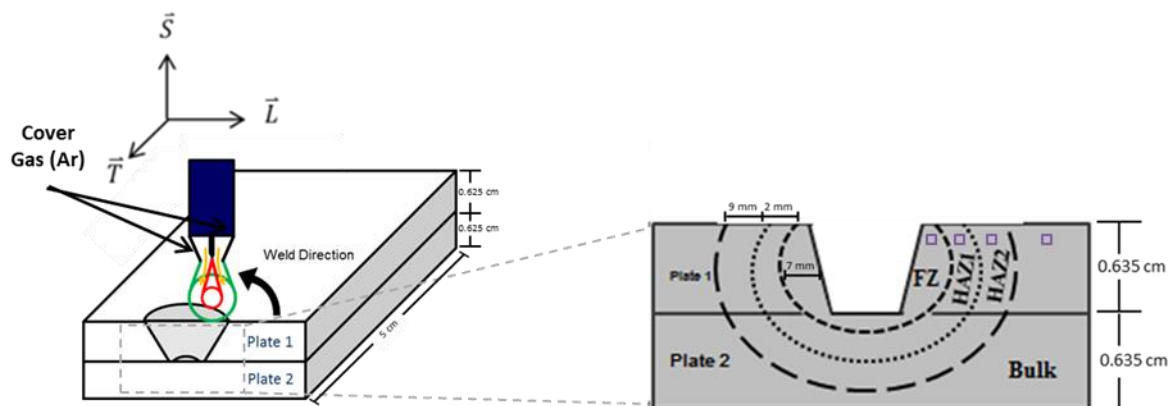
1. Schematic of TIG welding process and a schematic of weld zones, specifying the FZ and HAZs. Far enough away from the weld zone, the sample will become unaffected base material. All samples were welded through a 45° countersunk hole in order to have full penetration through both plates. The area of the isolated weld zone test locations is marked.
